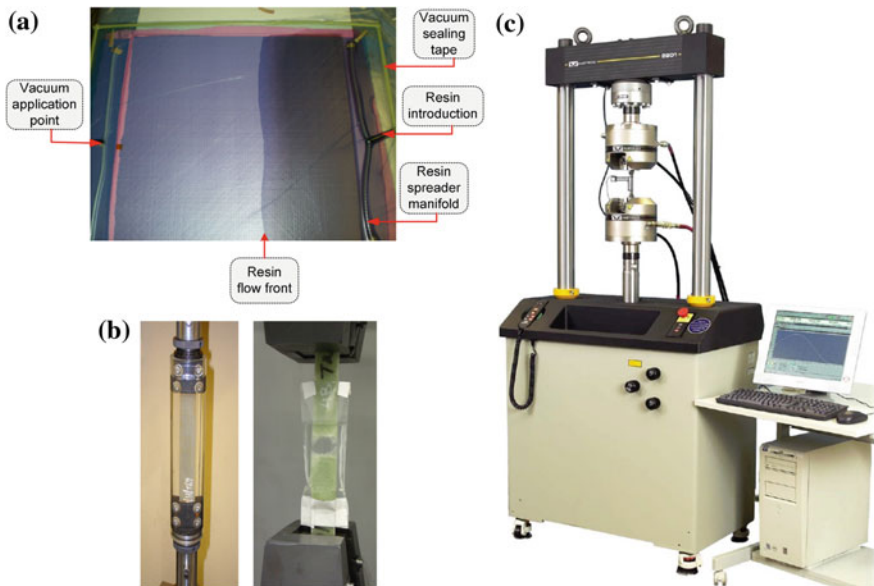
Coupon manufacturing and testing. a Vacuum-assisted resin transfer moulding process; b Saturated specimens immersed in tap water (using acrylic tube with O-ring seal and polythene pouch with waterproof tape) during testing; and c Instron 8801 fatigue test machine
